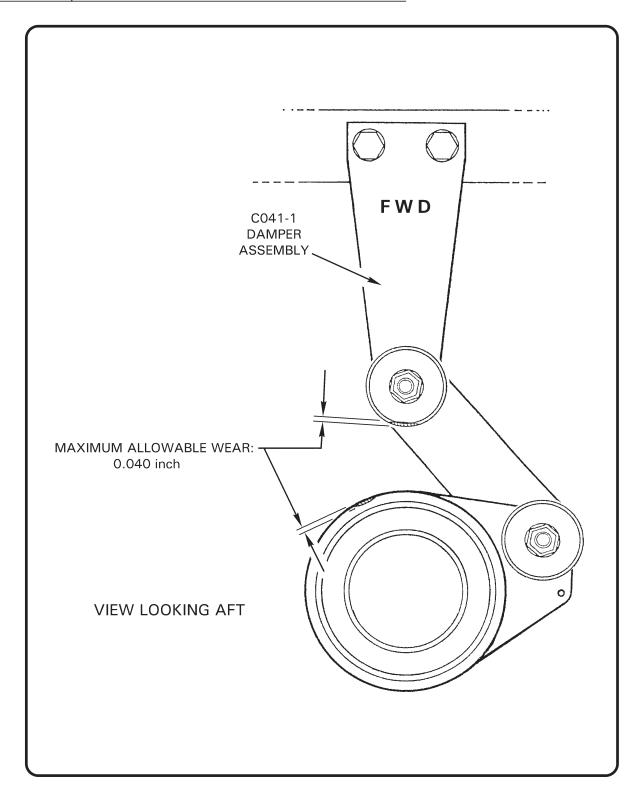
TAIL ROTOR DRIVE SHAFT DAMPER BEARING INSPECTION
